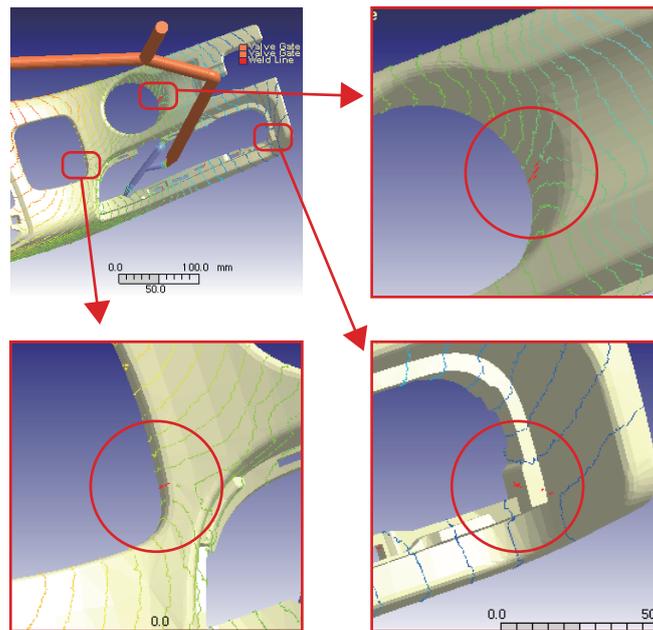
Two weld lines were moved to the corners and one weld line (upper right) was visible, but would be covered by another part in the assembly.
